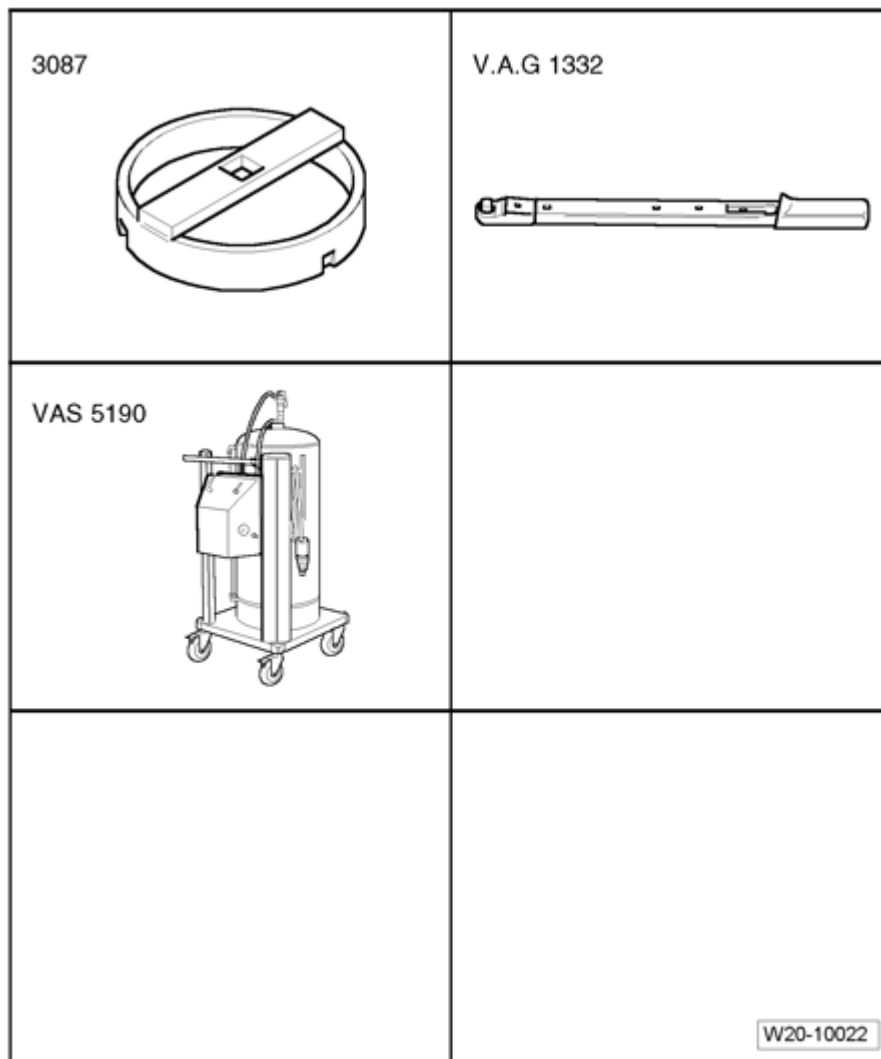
Identifying Special Tools - Fuel Tank, Draining
